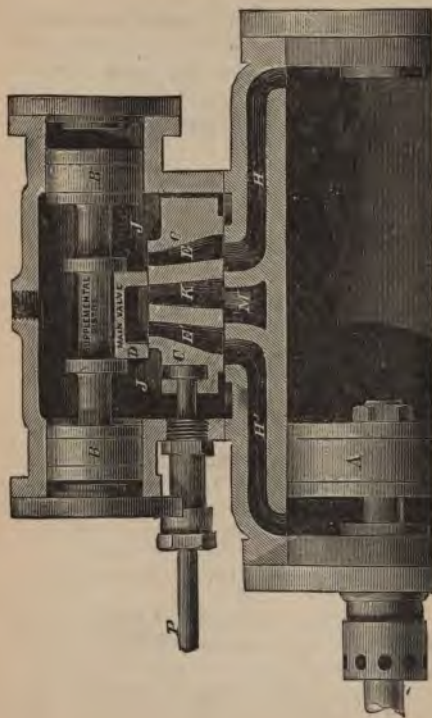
LENGTHWISE SECTION, STEAM END, BLAKE PUMP.
